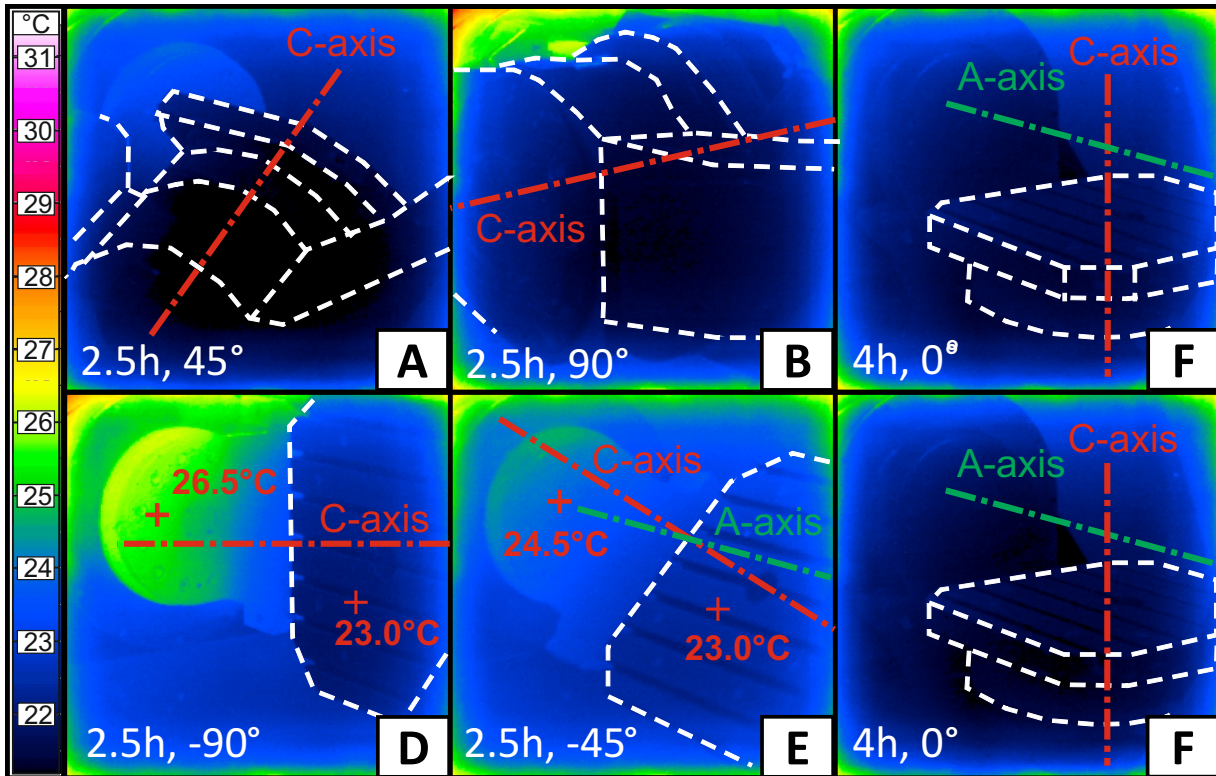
Machine tool A/C - IR-camera measurement of temperature distribution in the machine tool structure: Thermal load input by horizontal swivelling axis. A: 2.5 h standstill at 45° tilting angle (view from the bottom / side of the swivelling unit), B: 2.5 h / 90° (view from the bottom of the swivelling unit), C: Cool-down 4 h / 0°, D: 2.5 h / -90°, E: 2.5 h / -45°, F: 4 h / 0°.
